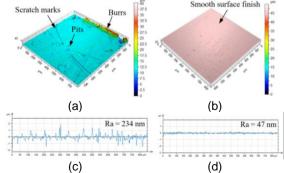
3D surface topography of gear tooth involute profile (a) before and (b) after finishing; surface
